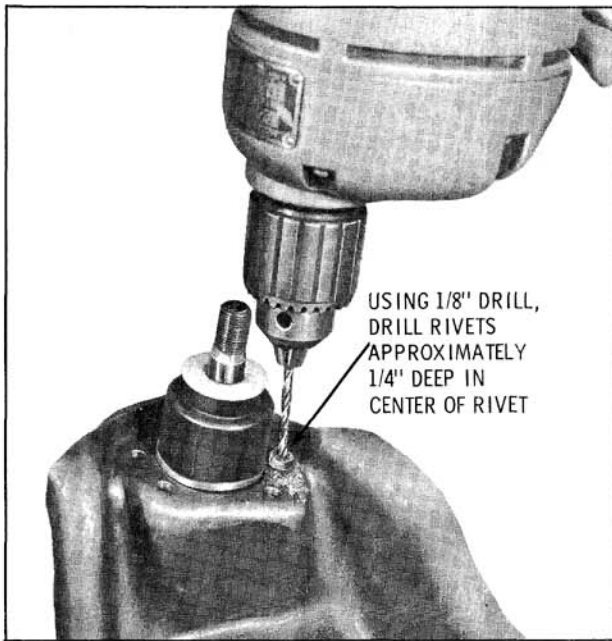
Drilling Upper Ball Joint Attaching Rivets
